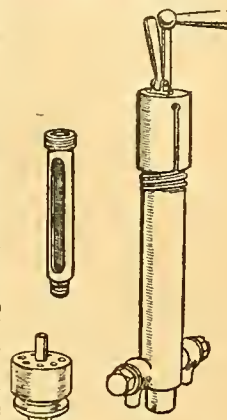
Hand pump and adjustable valve on the Scott engine.
